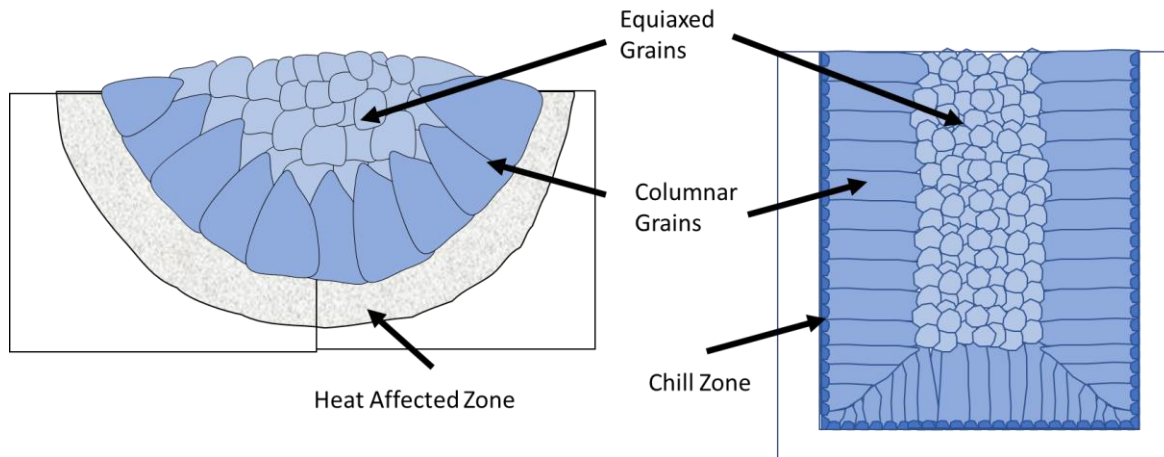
Schematic of grain structure in a typical fusion weld on the left and a cast metal on the right. Main difference is the presence of heat affected zone (HAZ) in a weld and the chill zone in the casting. Columnar grains and equiaxed grains are very similar in both.
